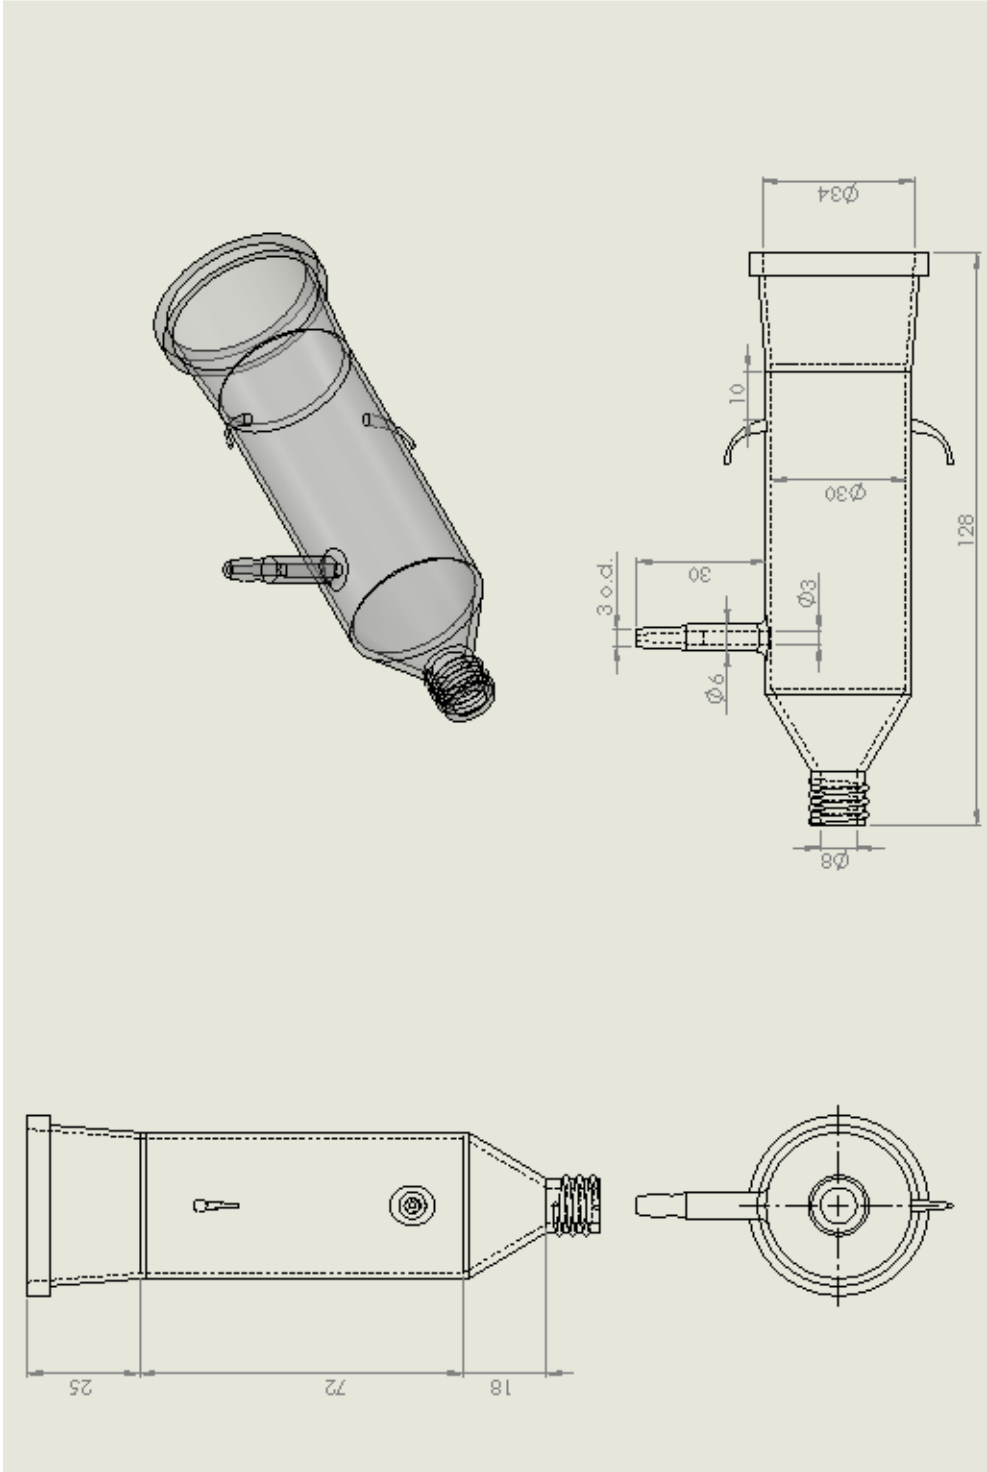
Drawing of the «Bufferglass long end» with dimensions.
